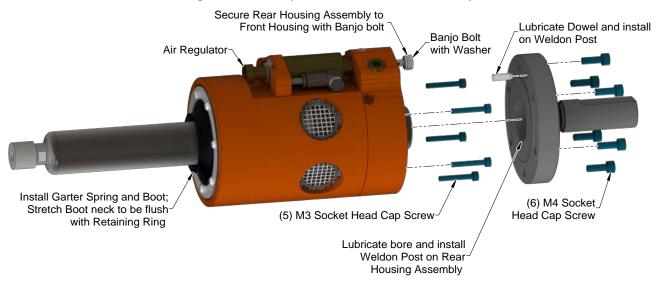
Turbine Motor Reinstallation on Rear Housing
